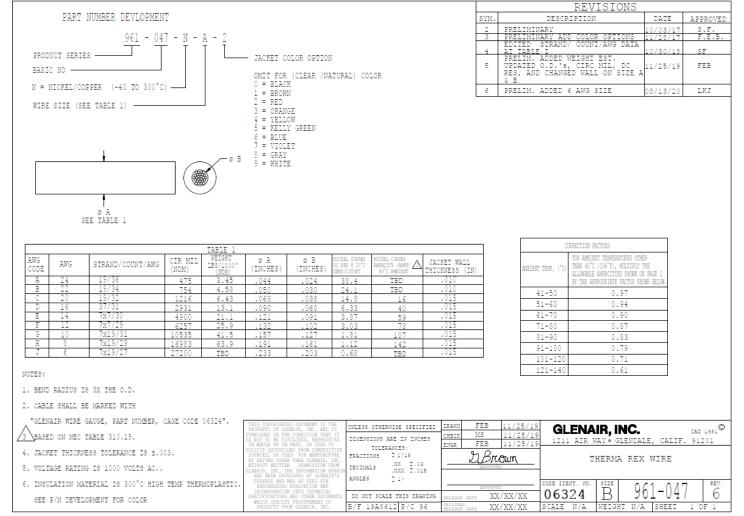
Glenair ThermaRex™ Wire drawing 961-047
